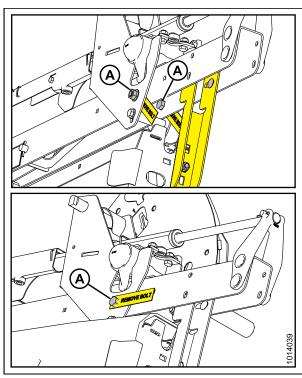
Reel Right Arm (Parts Removed for Clarity)
